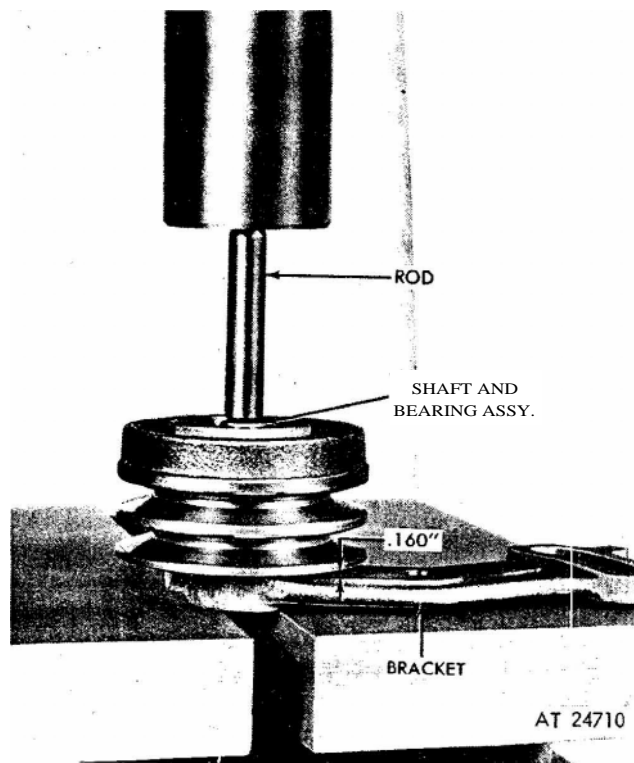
Installing shaft and bearing assembly and pulley in bracket
